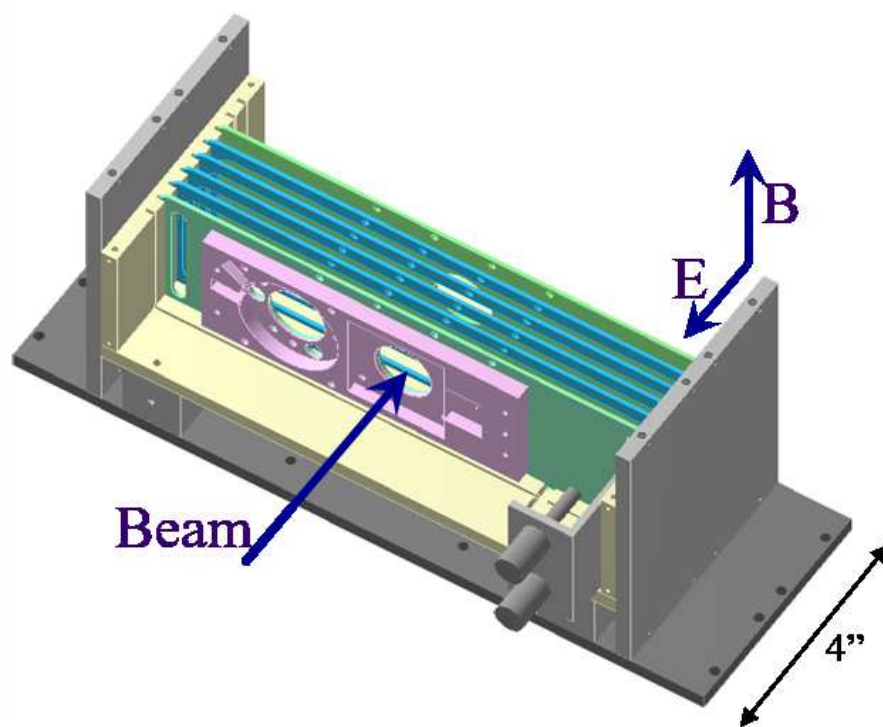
CAD drawing of an  $E \times B$  detector, shown in a cutaway view.
